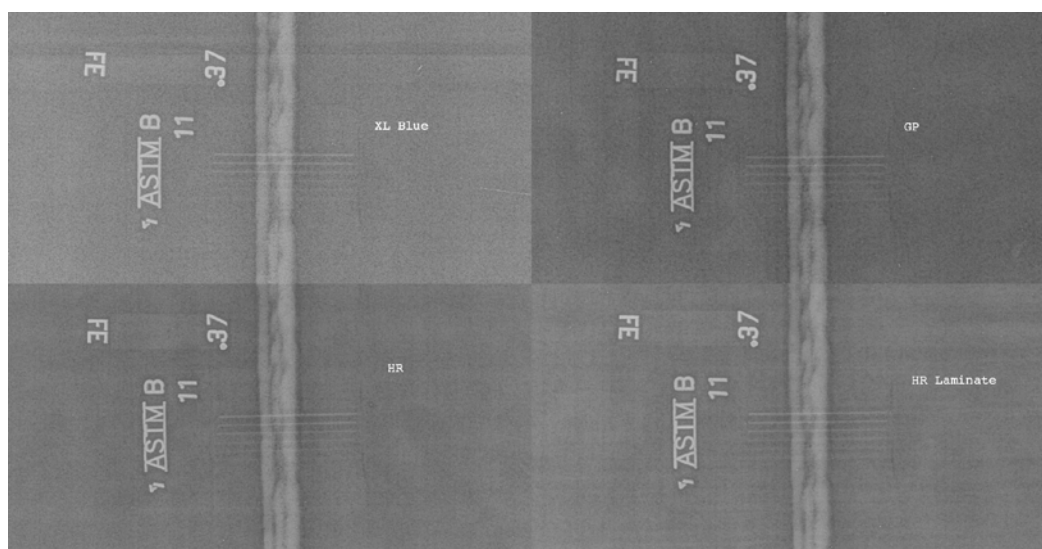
Weld Coupon Radiographs with Iridium Exposure.
